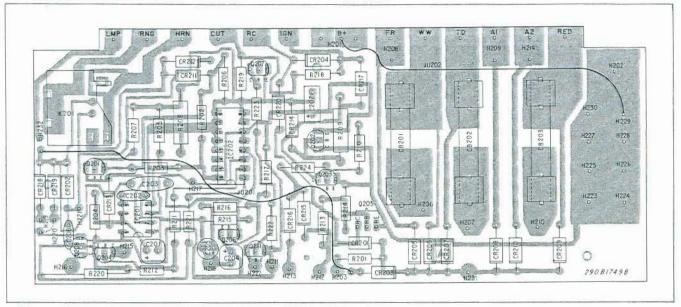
A. Model CC1 Board Assembly Control Module Parts Location Diagram (for units with SPKR label on TB1).
